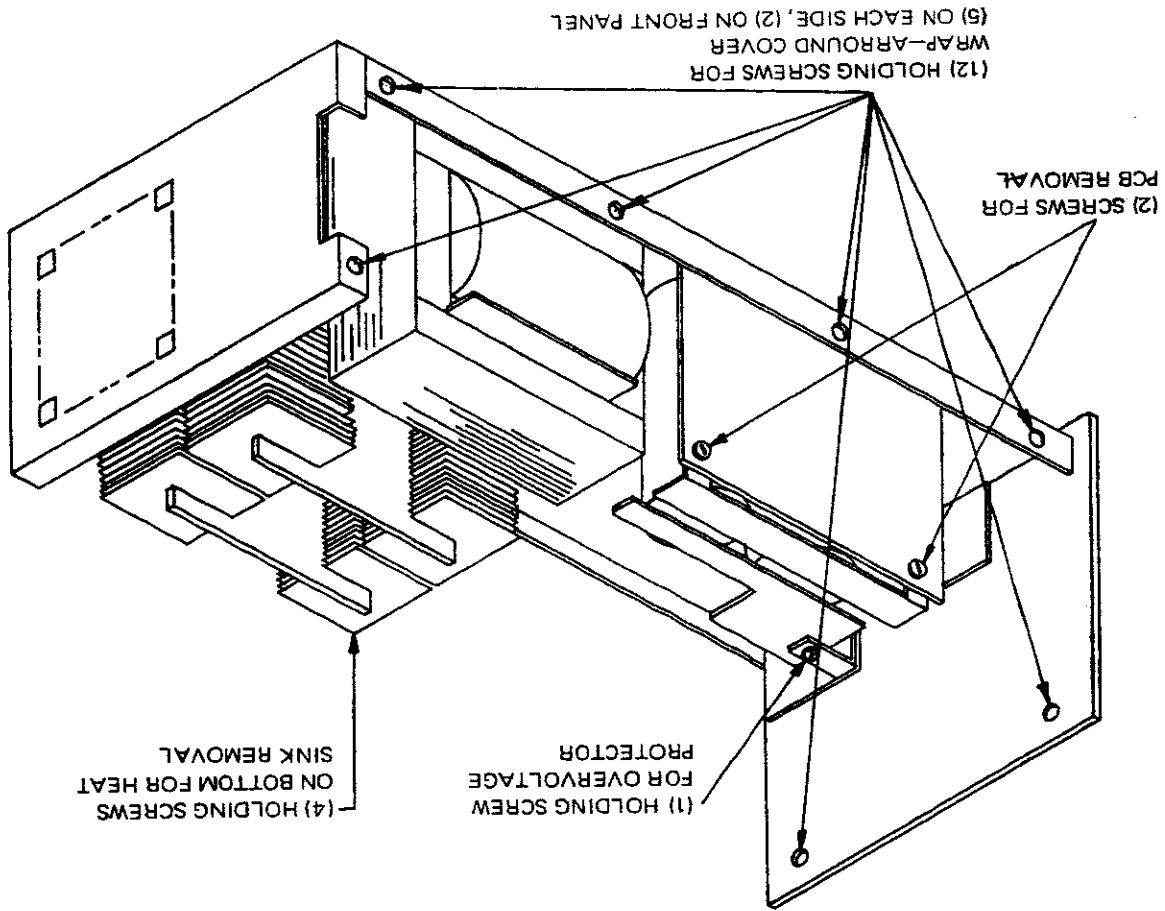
DISASSEMBLY, JQE HALF-RACK MODELS.
